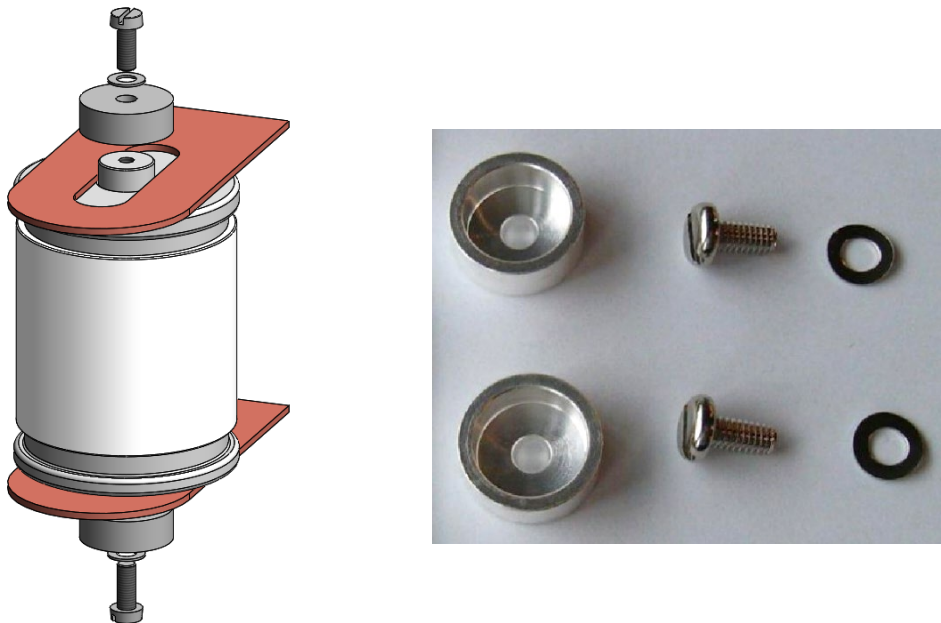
Schematic view of mounting of CFMN C and D geometry with mounting kit 058-070
